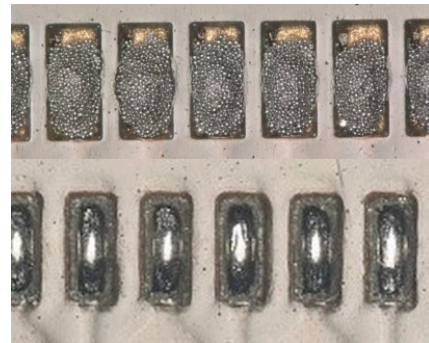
Top: Solder paste printed on Cu microcable. Bottom: Solder paste after reflow.
